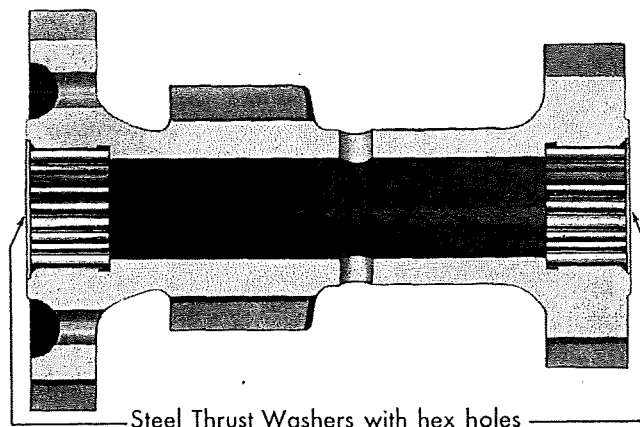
Group No. 15 Needle Bearing Cluster Gear
